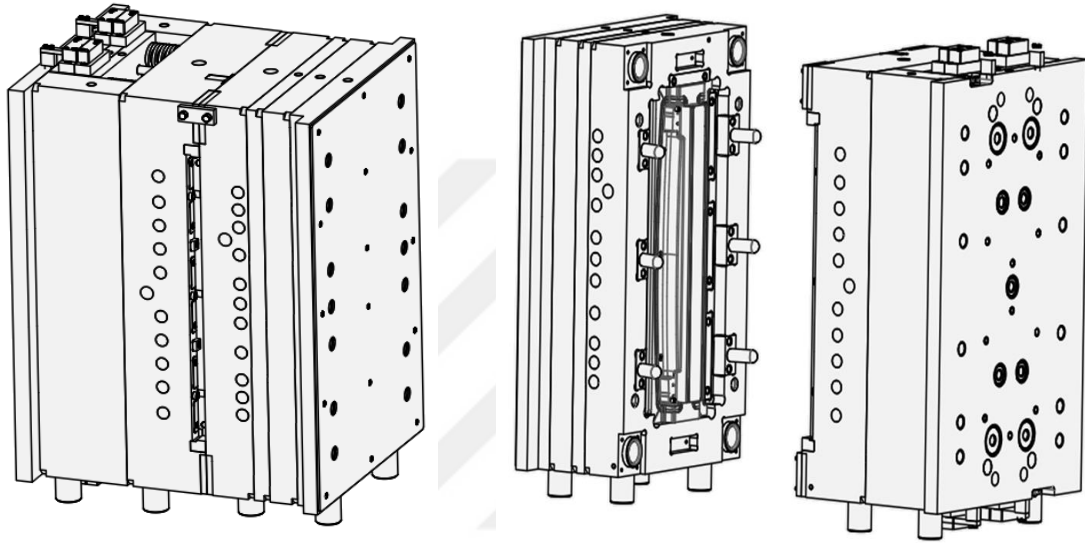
3D DRAWING OF THE INJECTION MOULD USED FOR THIS RESEARCH
